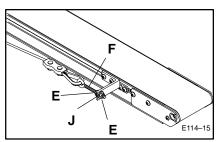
Pull Cord and Eye Bolt to End Fitting Mounting Bracket Attachment Detail
